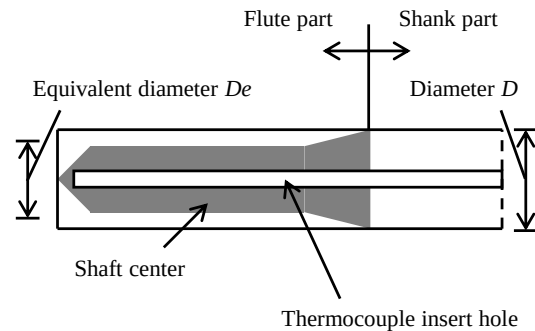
Cross-sectional schematic view of temperature measurement tool
